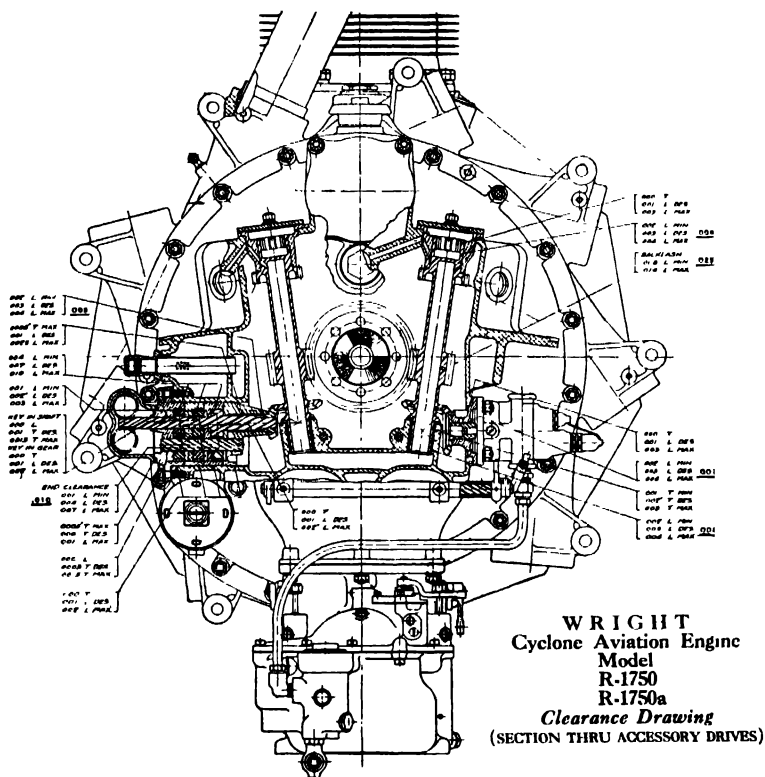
Clearance Drawing Showing Section Through Wright "Cyclone" Engine Accessory Drives.
